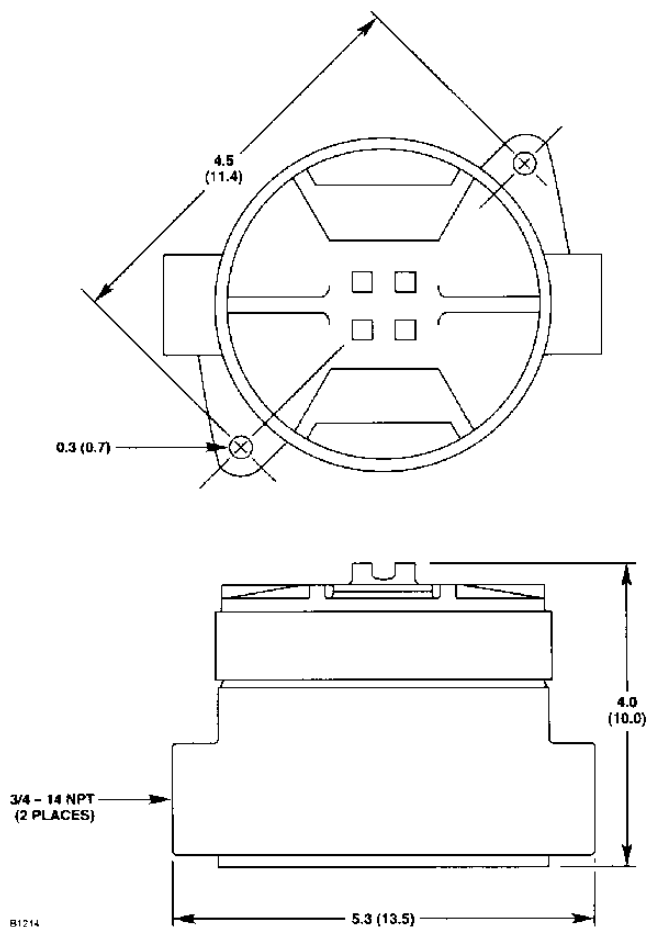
Junction Box Dimensions in Inches (Centimeters)
